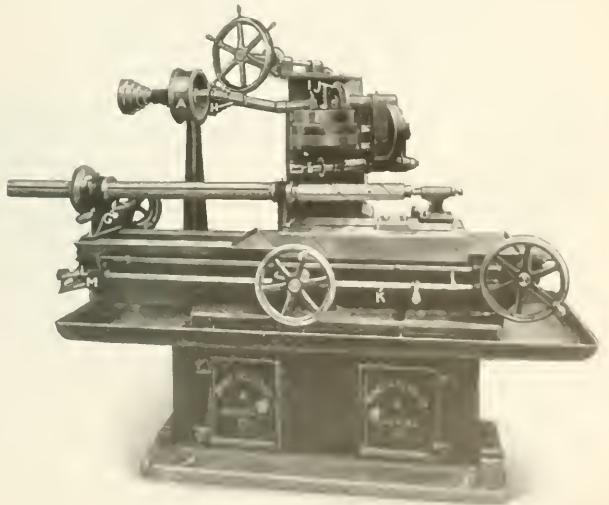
Bowen Milling Machine set up for milling a Helical Groove
